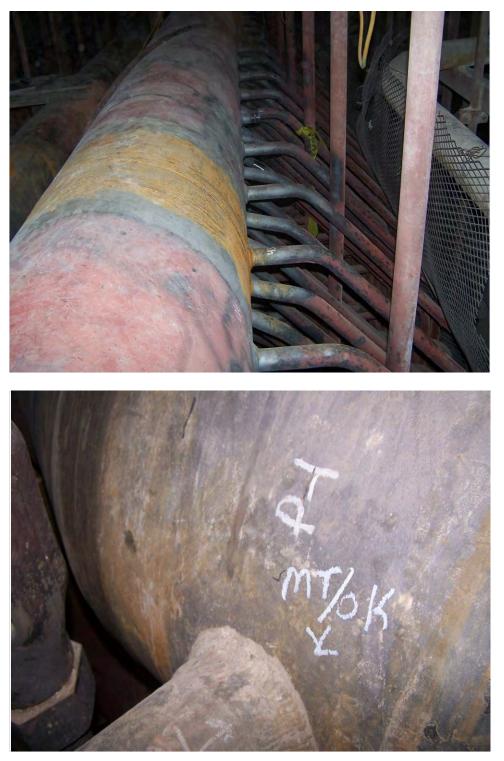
Photographs of the inspection locations on the Upper Finishing Superheater Outlet header.
